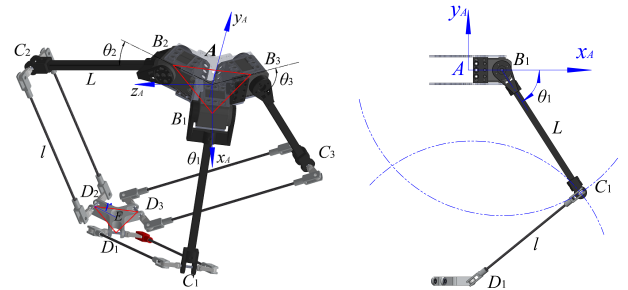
3D model of the Delta manipulator employs purely revolute joints.
